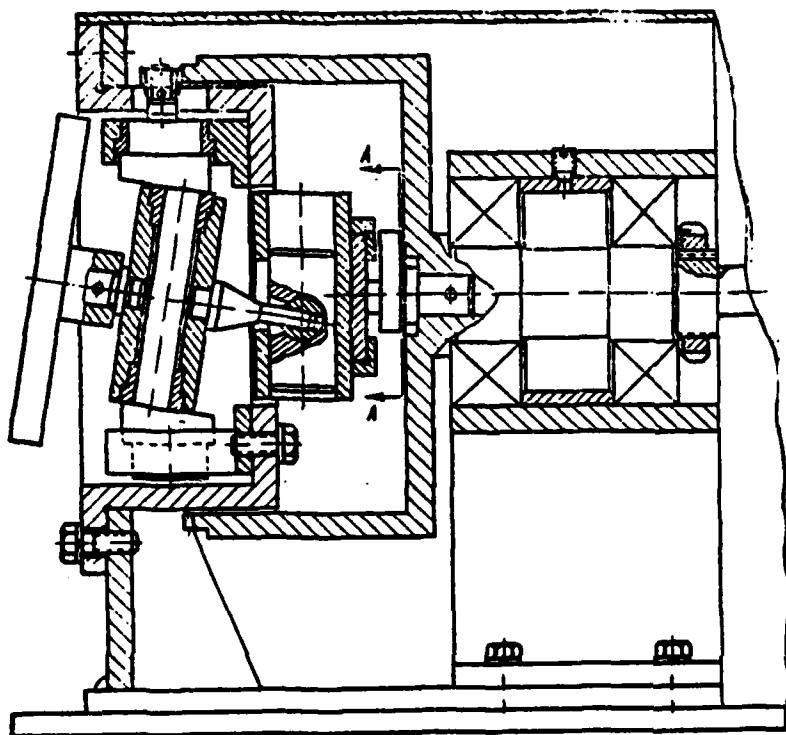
The search mechanical scanning device/equipment in which is used three-dimensional-spherical actuator of platform.
